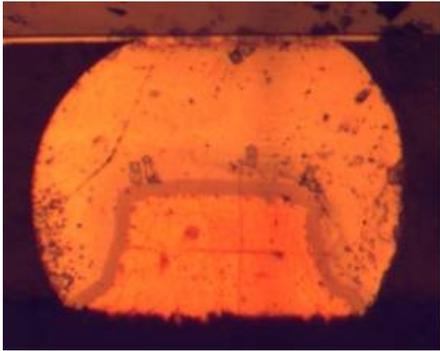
Good Soldering of a Damaged LF2 Bump With Stencil Printing
